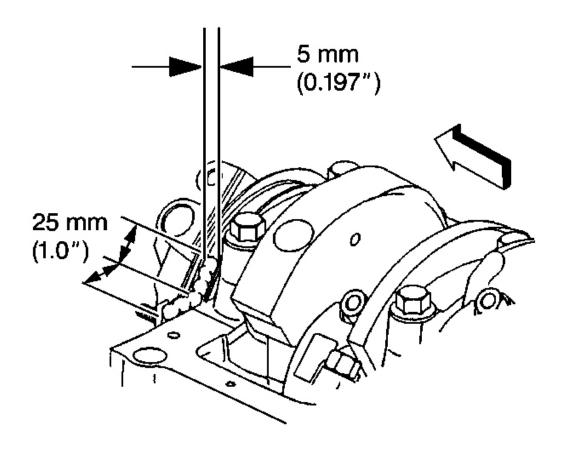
Applying Adhesive To Engine Sides Front Cover To Engine Block Junction Courtesy of GENERAL MOTORS CORP.
